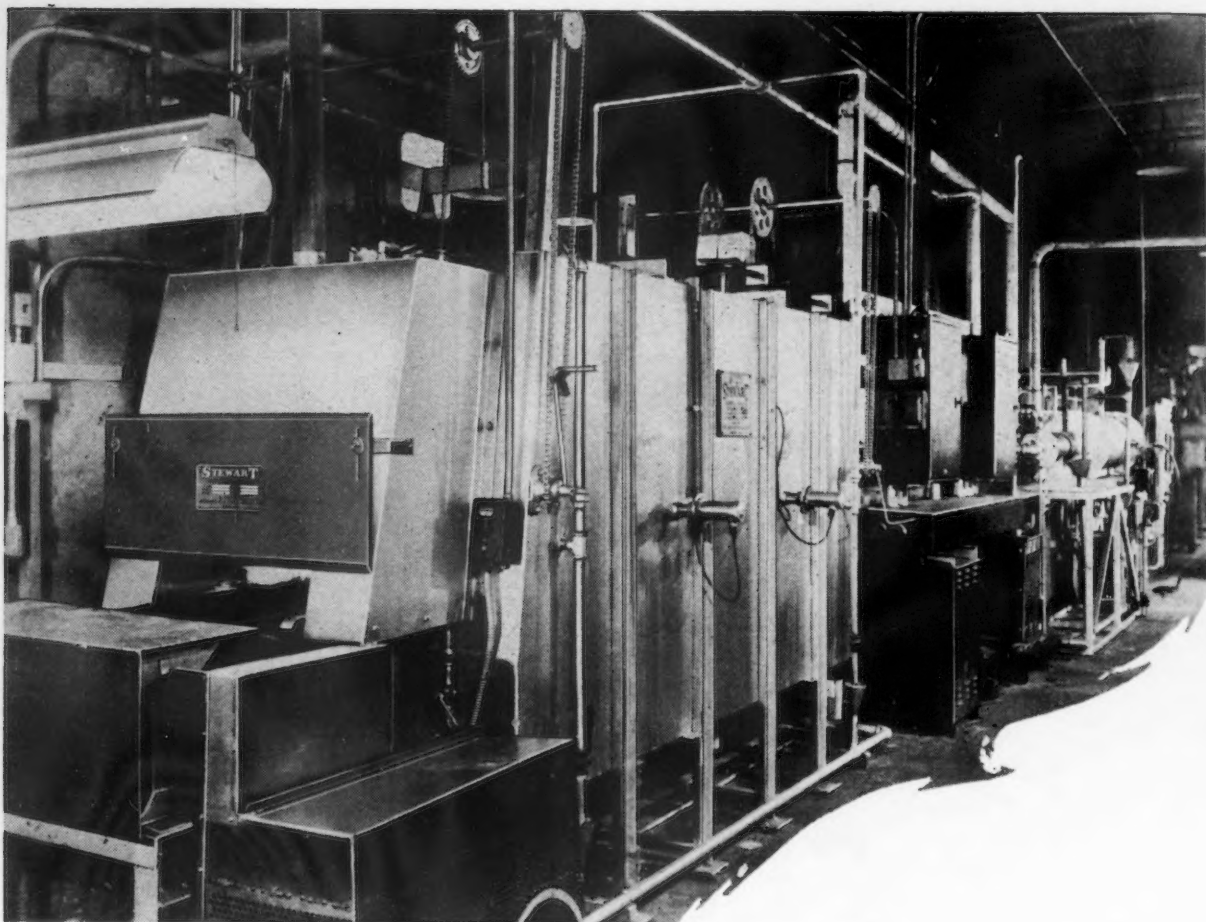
End and side view of the electric, continuous brazing furnace. The unit is used for copper brazing parts that go into the assembly of several widely used domestic products. The atmosphere generator is at the extreme right.
